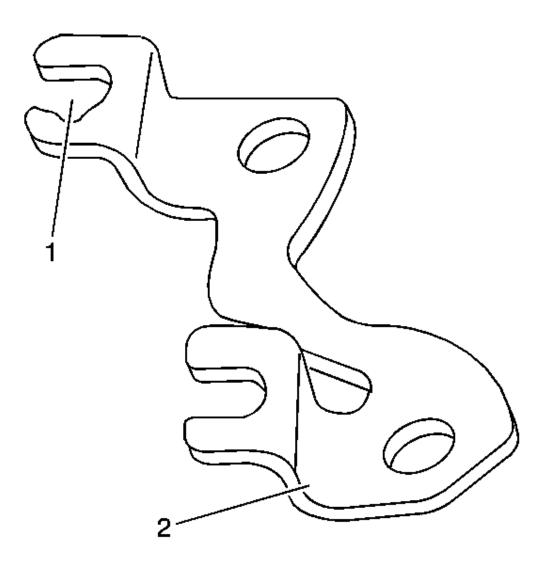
Inspecting Push Rod Guides Courtesy of GENERAL MOTORS CORP.
